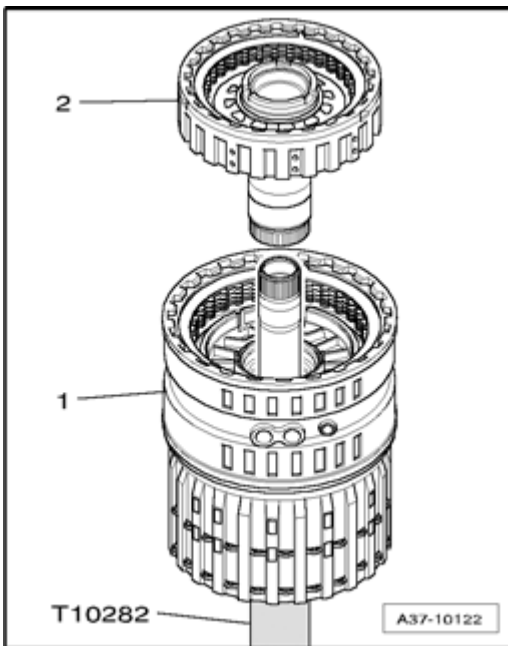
Removing/Installing Clutch "C" With Sun Shaft From Cylinder "D/E"
